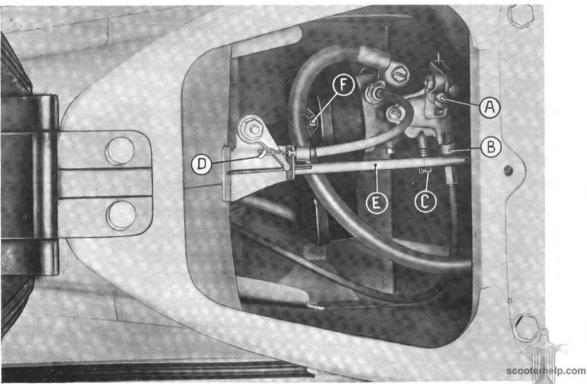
To approach the carburettor and air cleaner assy. (see instructions at pag. 26 and 28)
